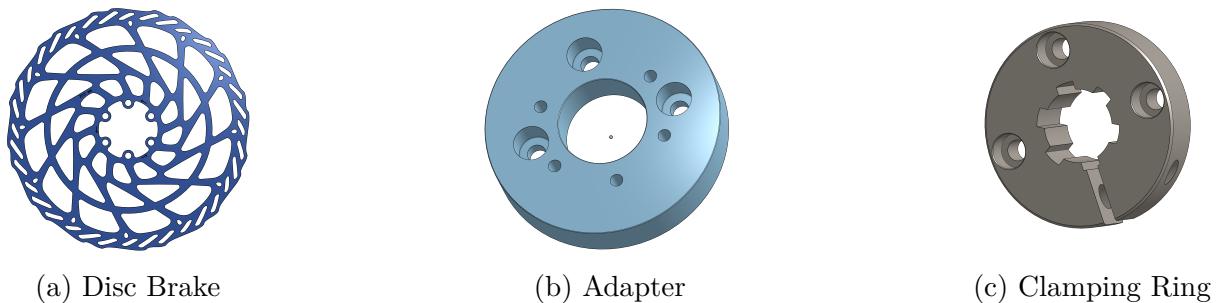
Disc, Clamping Ring, and its Adapter
